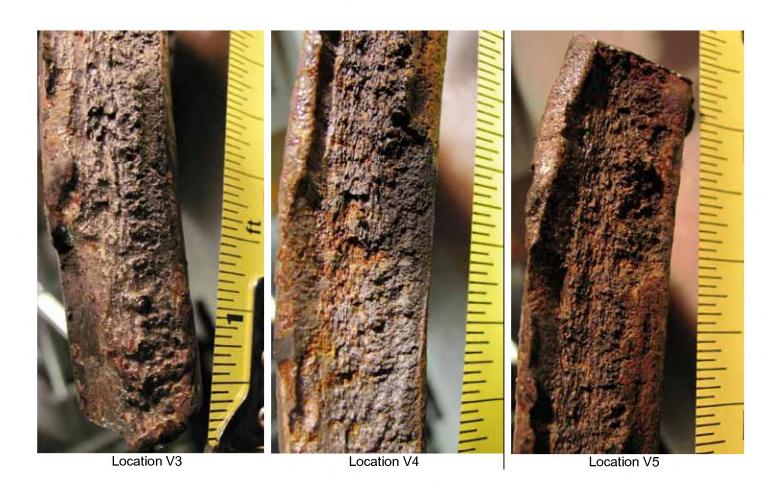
Fracture surfaces along the CS4 weld. ID is on the right, where the measure tape is located.
